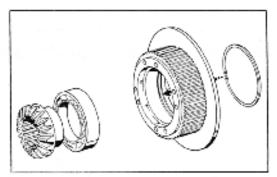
Reverse Clutch Flange, Roller Bearing and Bevel Gear.
